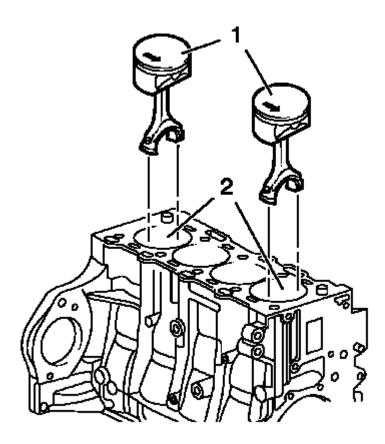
Pistons 1, 4 And Cylinder Bore Courtesy of GENERAL MOTORS COMPANY
